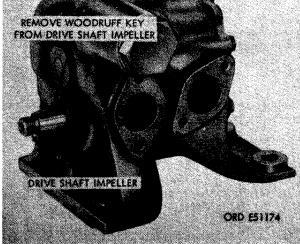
REMOVING OR INSTALLING DRIVE SHAFT IMPELLER WOODRUFF KEY.
